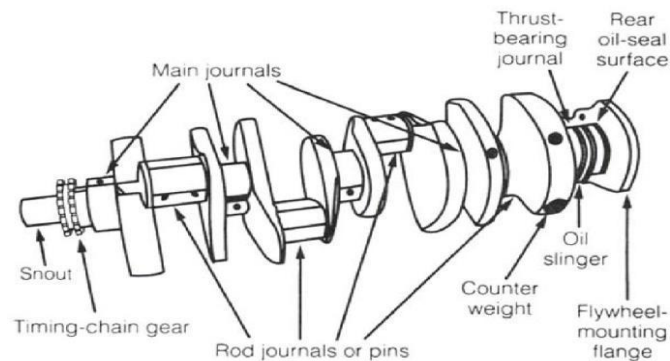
Typical Crankshaft with Main Journals that Support the Crankshaft in the Engine Block, Rod Journals is offset from the Crankshaft Centerline
